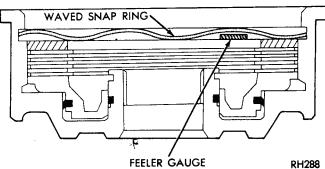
Measure Front Clutch Plate Clearance FRONT CLUTCH—A-727
